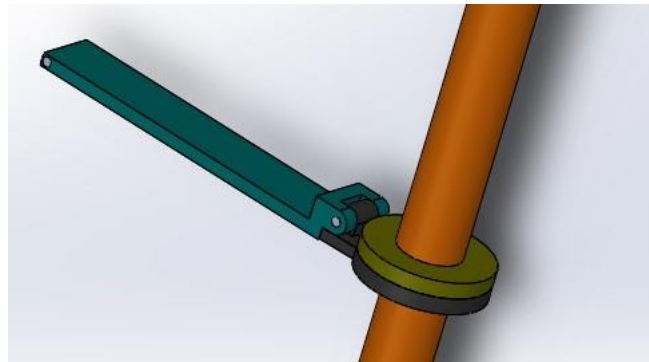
CAD model of mechanism designed to attached to the piston rod
